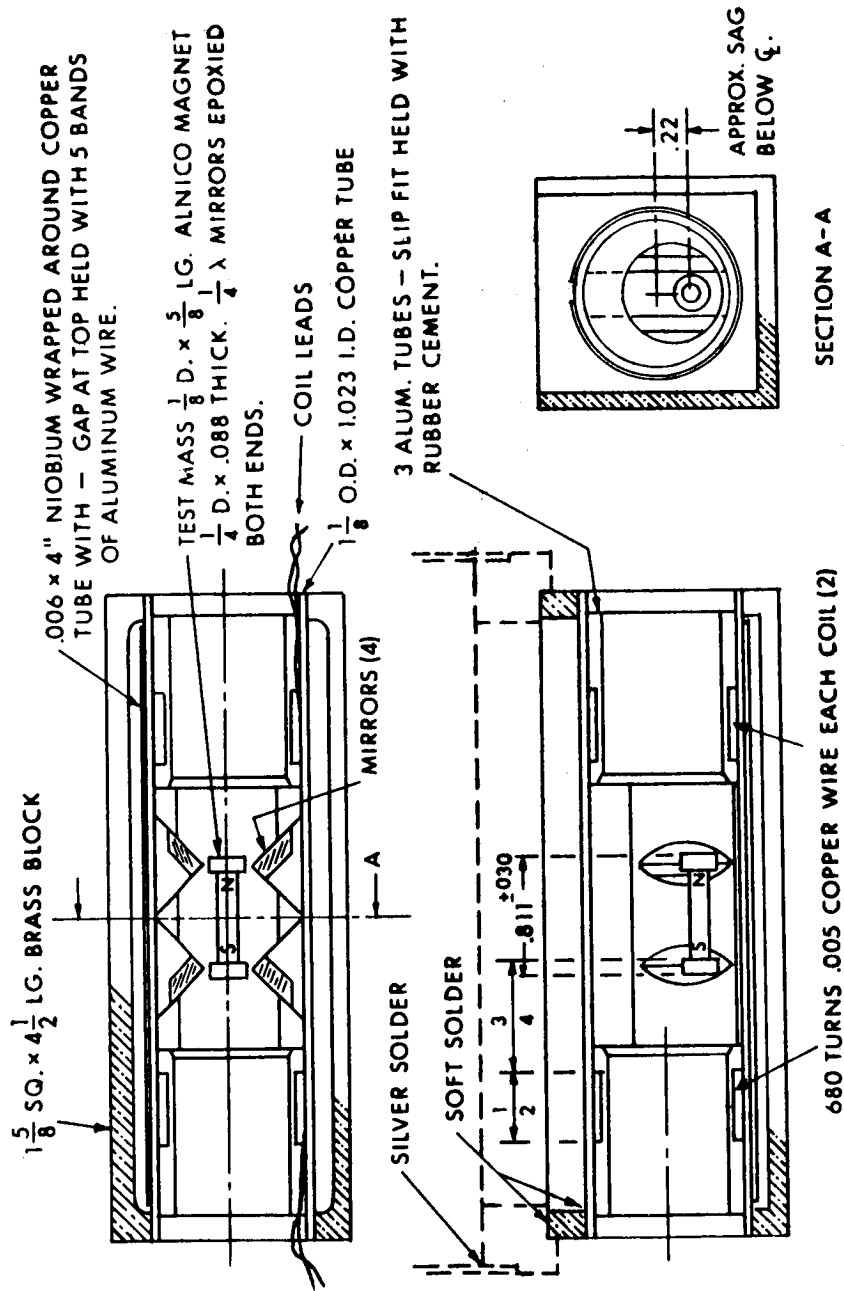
Detail of Superconducting Block and Mirror Assembly
